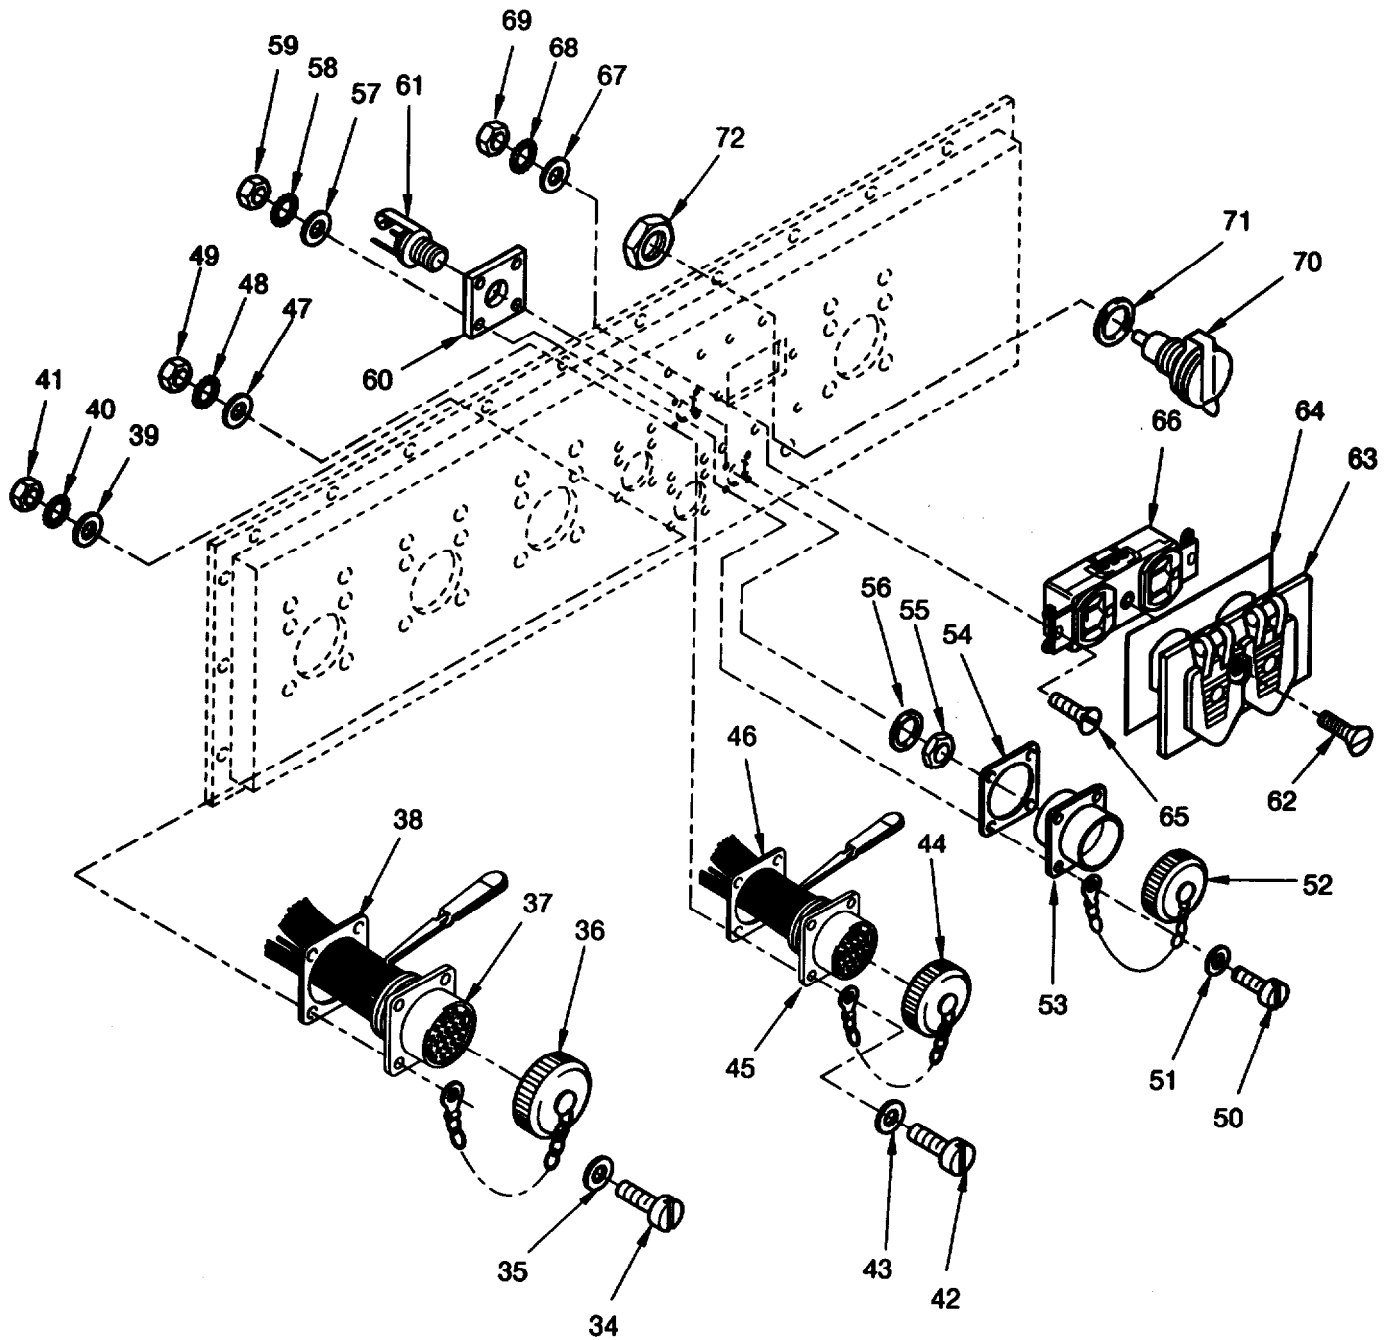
Connection Panel, Receptacles J6, J7, J11, J12 and J20 (sheet 2 of 2).
